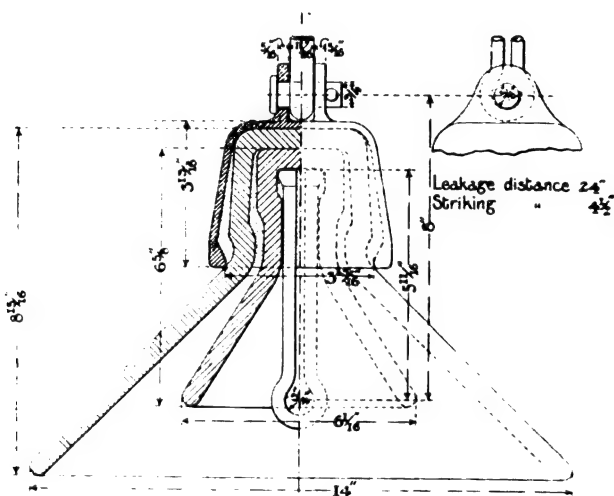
A.—Section of a Locke Suspension Type Insulator.
